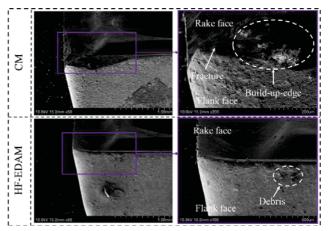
The tool wear SEM pictures of the two machining meth ods (CM and HF-EDAM) after machining 4500 mm
